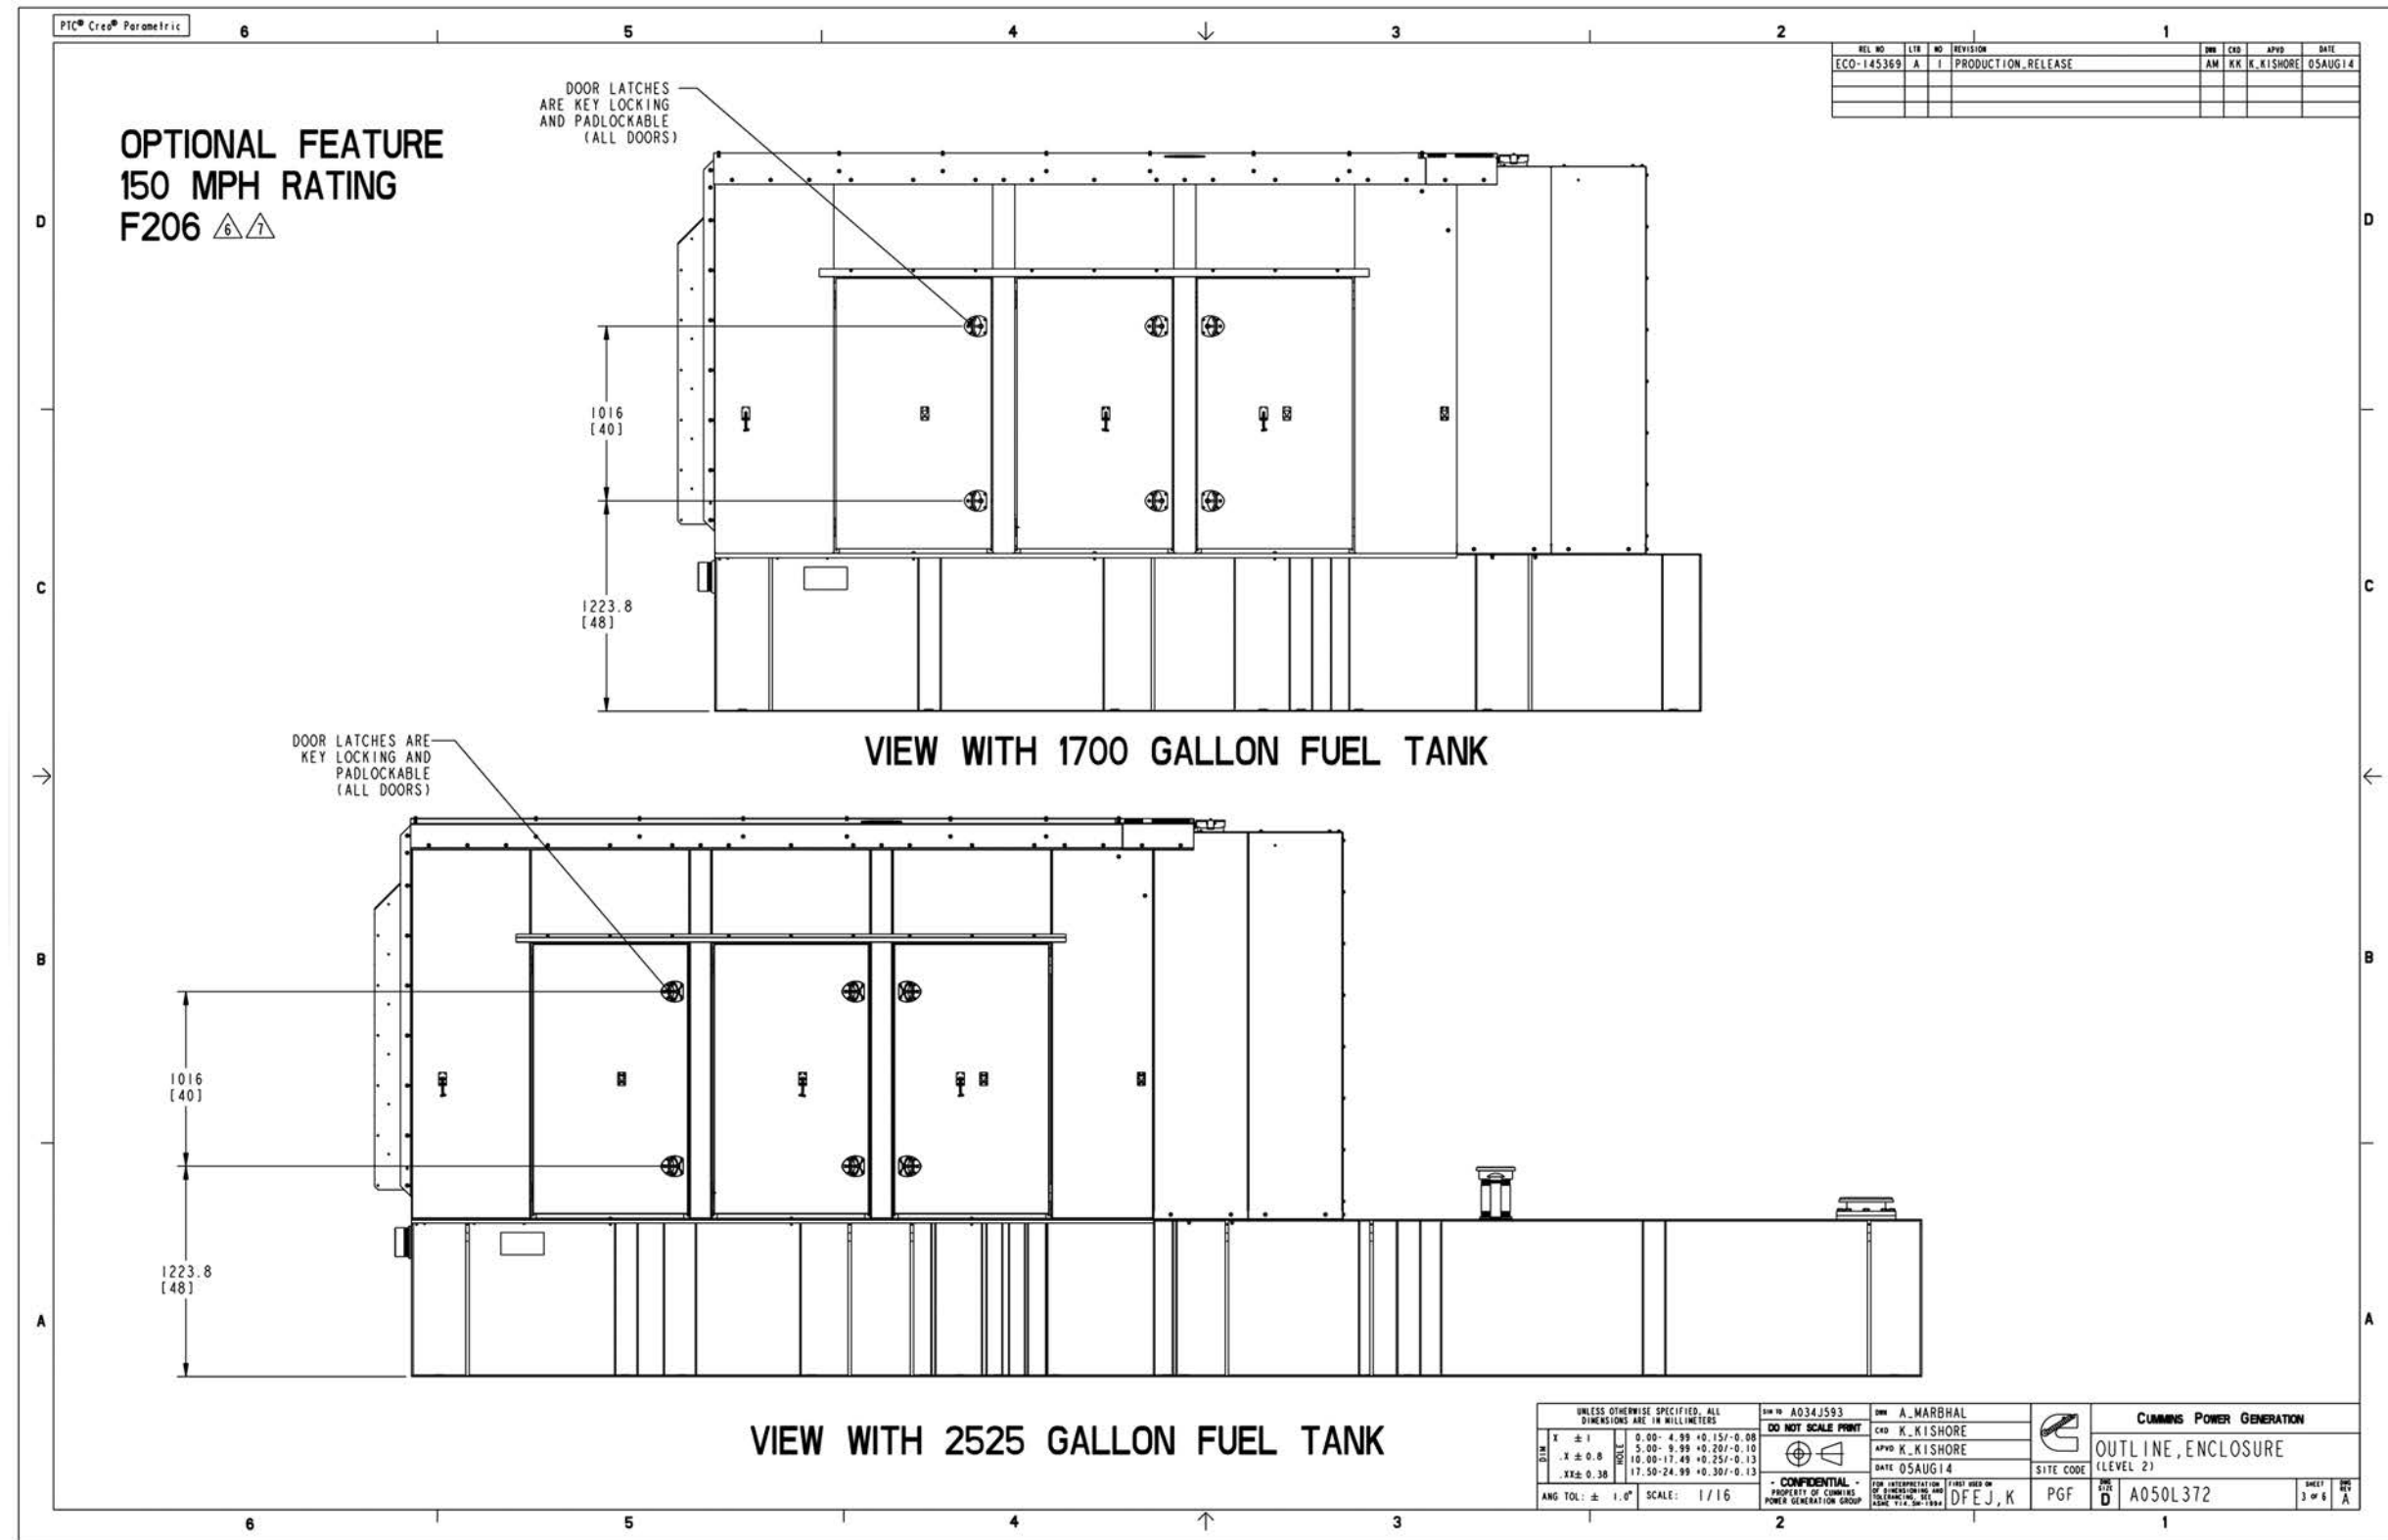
ENCLOSURE OUTLINE DRAWING (F202, F205, F206, F208, F209) (SHEET 3)
